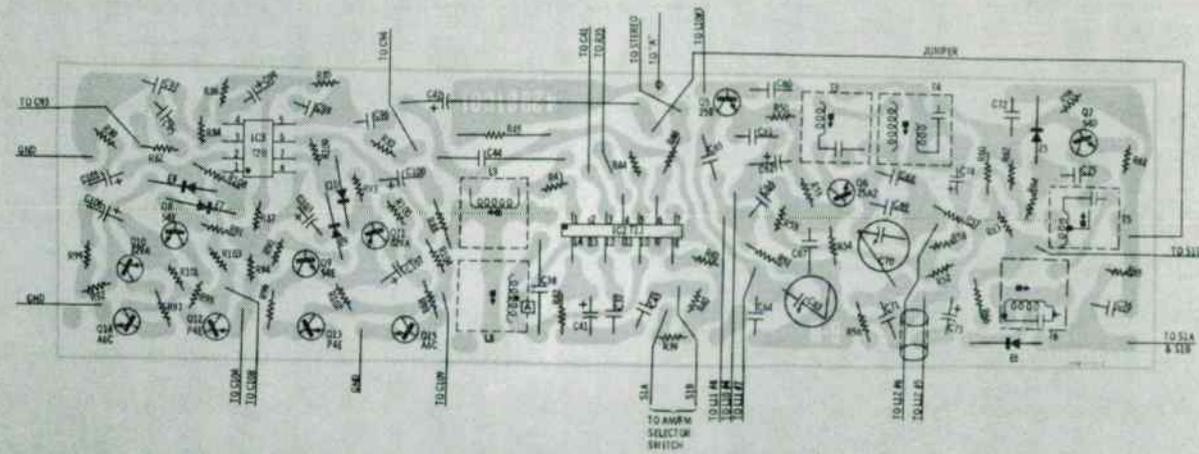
3802 AM/AUDIO/MPX PLATED BOARD DIAGRAM
